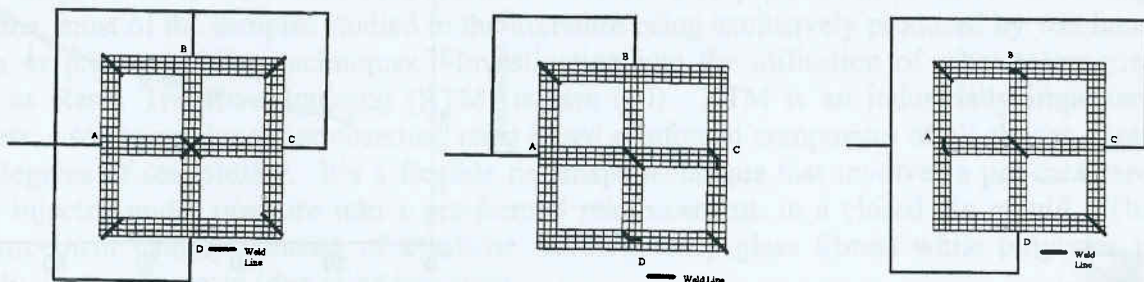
Optimum gate selection in the case of weld line on left lower corner of target cavity.
